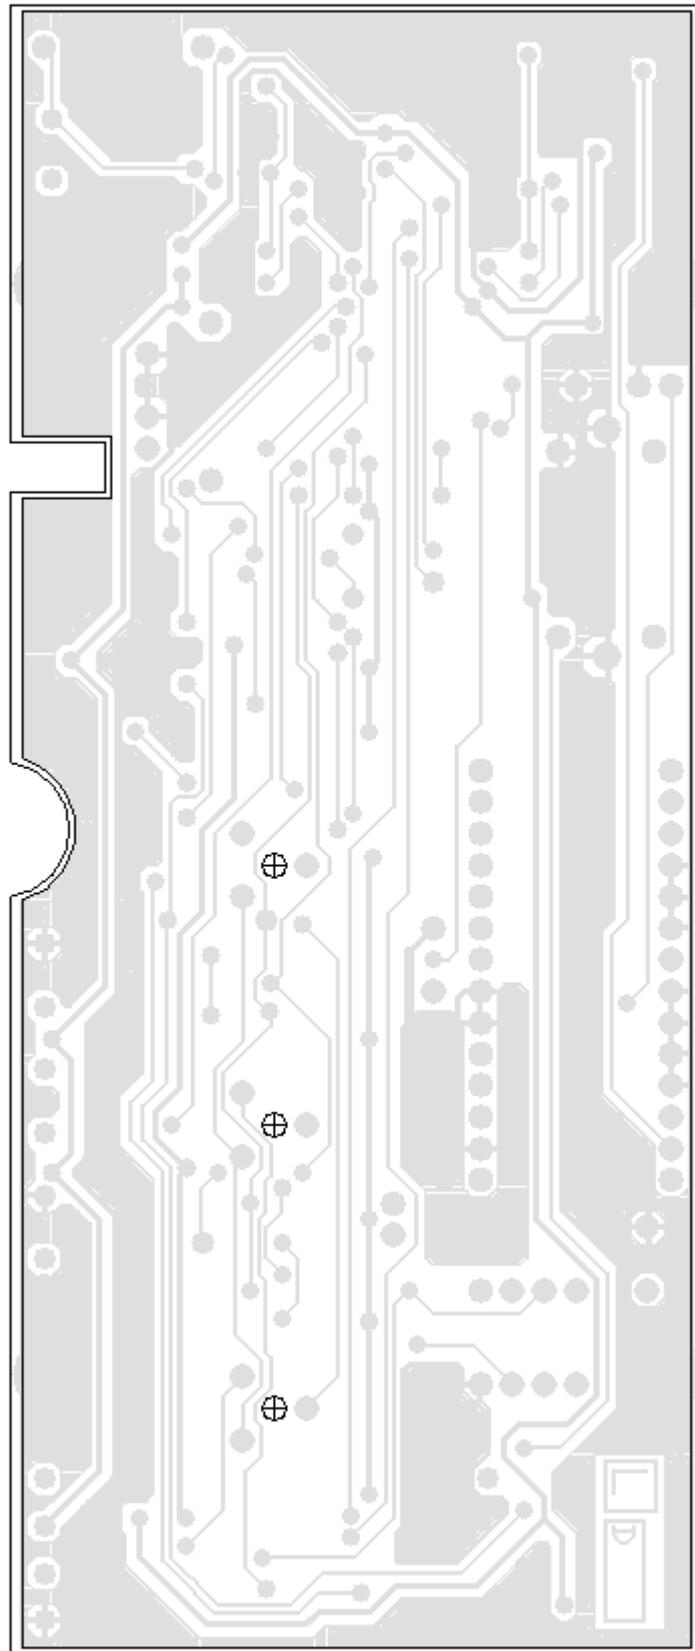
T800-30-0000/0002 PCB Layout - Bottom Side (IPN 220-01226-02)
